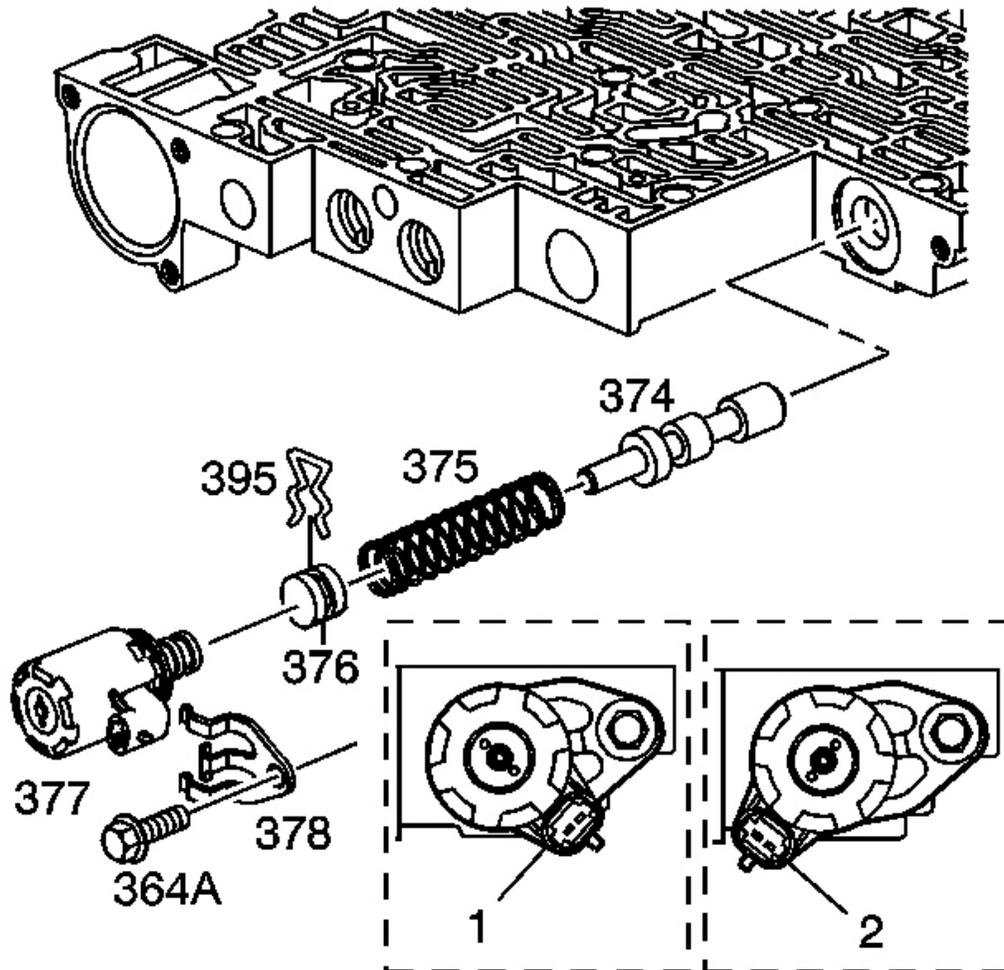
Pressure Control Solenoid, Bore Plug Retainer, Bore Plug, Actuator Feed Limit Valve Spring & Actuator Feed Limit Valve
